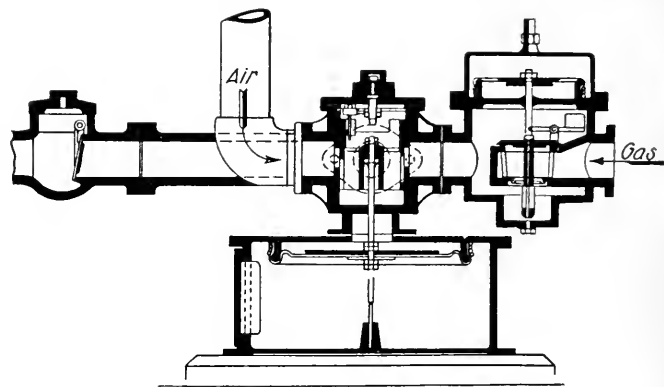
COUNTERBALANCED GAS GOVERNOR FOR HEAT-TREATING FURNACES
